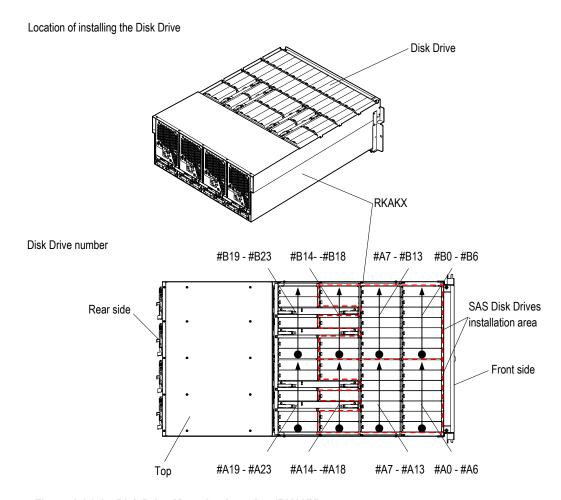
Disk Drive Mounting Location (RKAKX)
